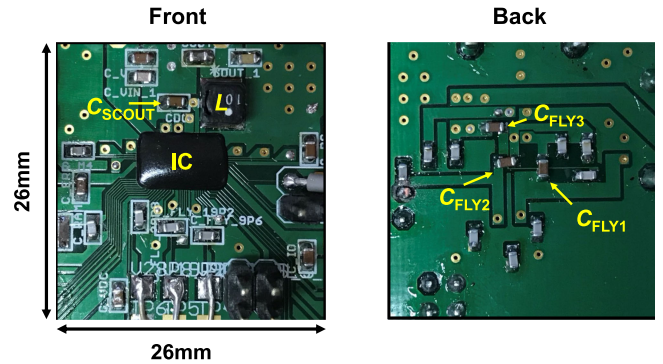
Partly enlarged photograph of PCB for the proposed FH dc-dc converter IC.
